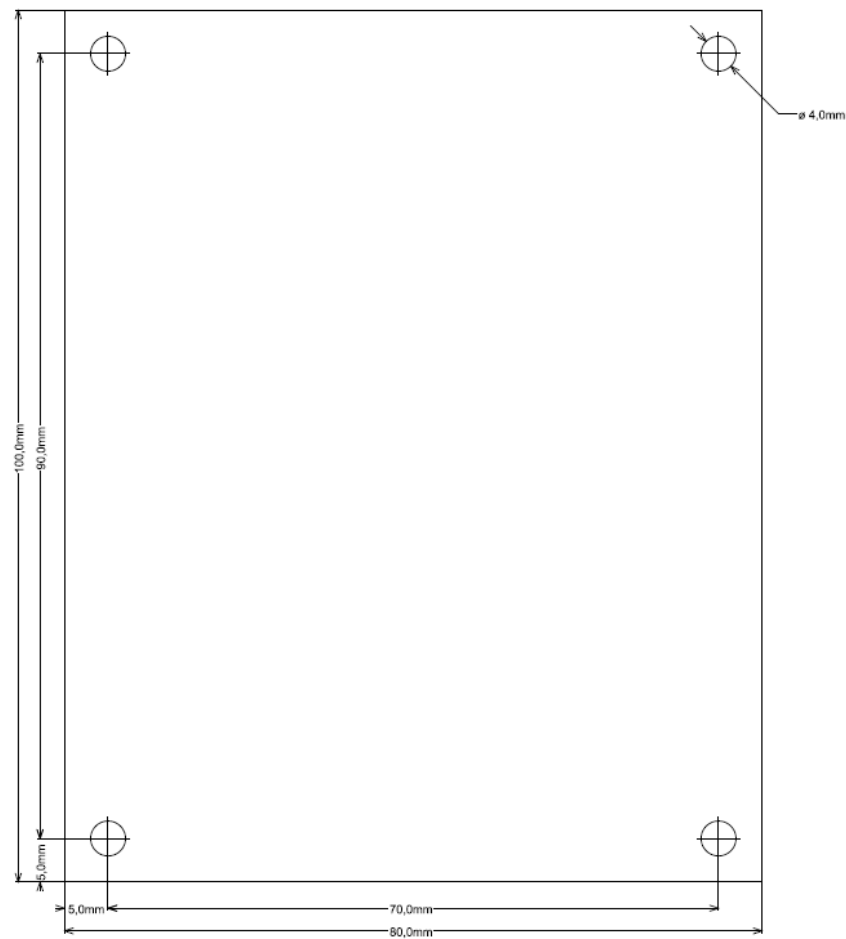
Dimensions of the Inpixon Swarm Chirp V3 Dev Board
